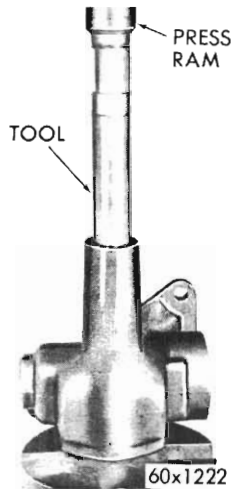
Removing cross-shaft needle bearings or installing outer needle bearings (typical) (Tool E19C20)
